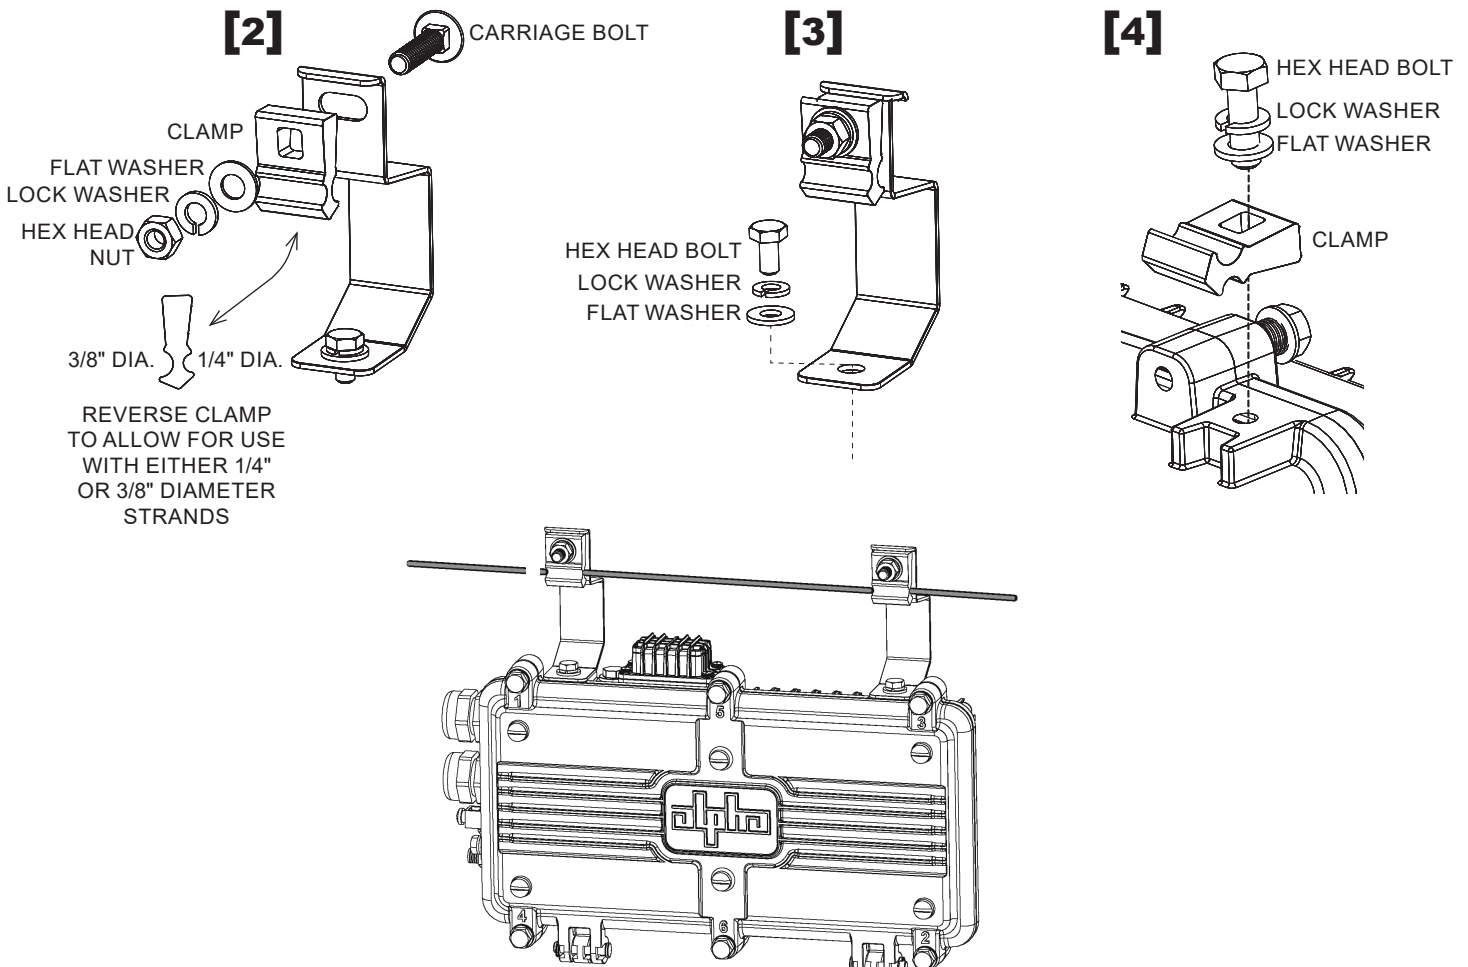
, Strand Mounting Bracket Installation, Vertical Configuration
